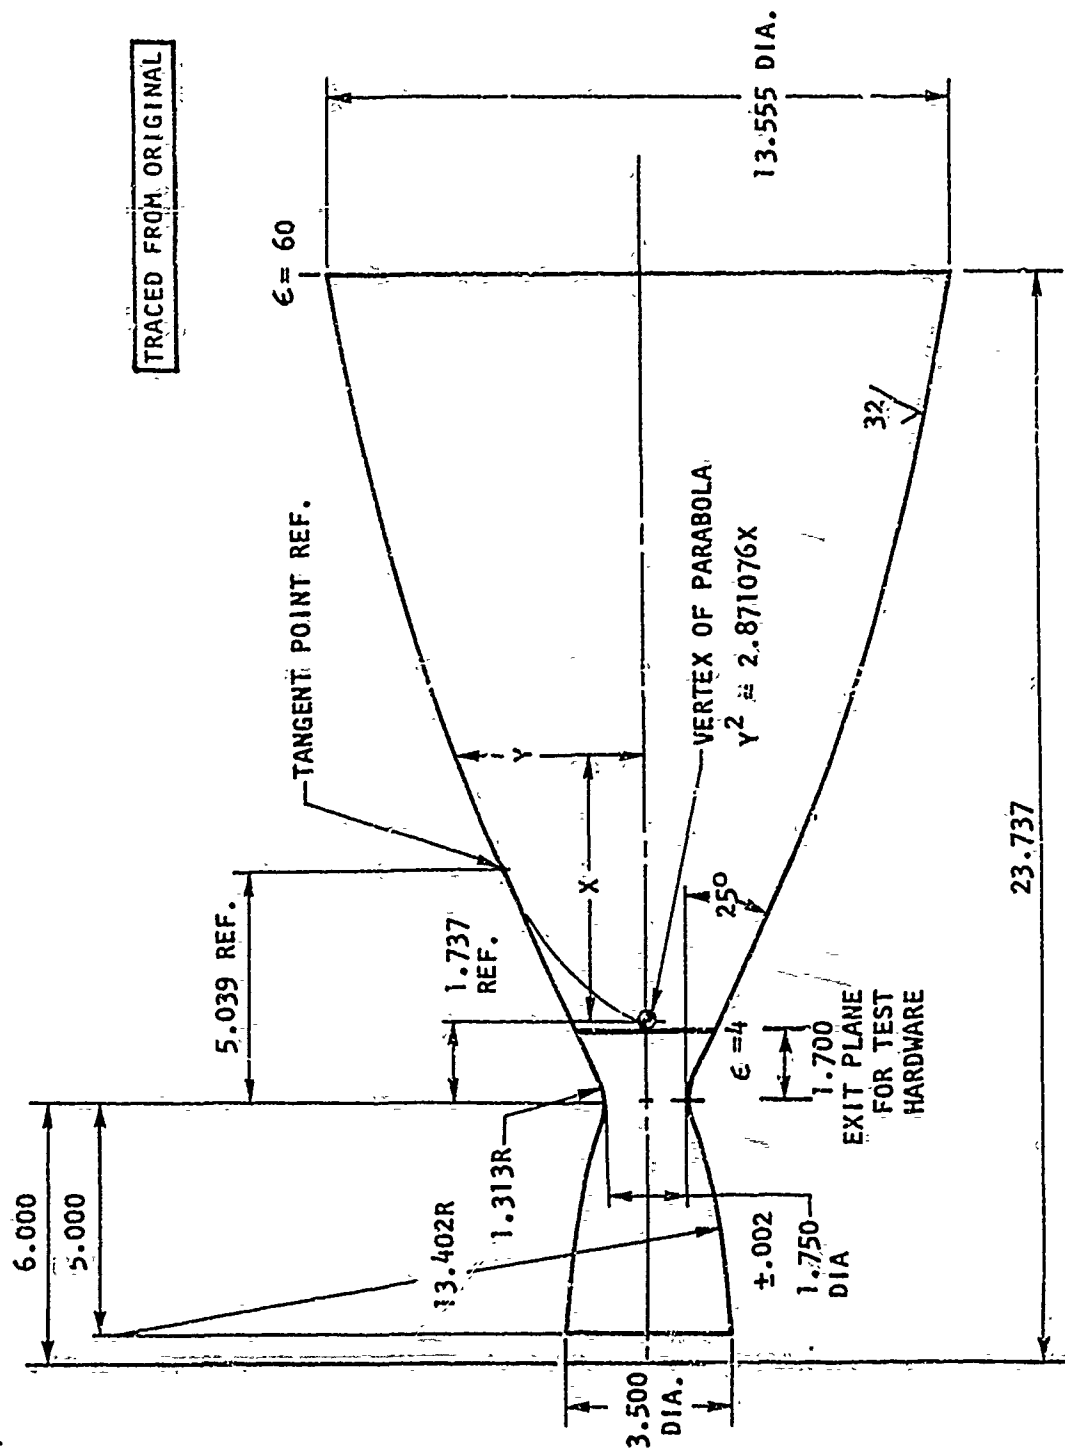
Rocket Engine Chamber Contour Internal Dimensions
